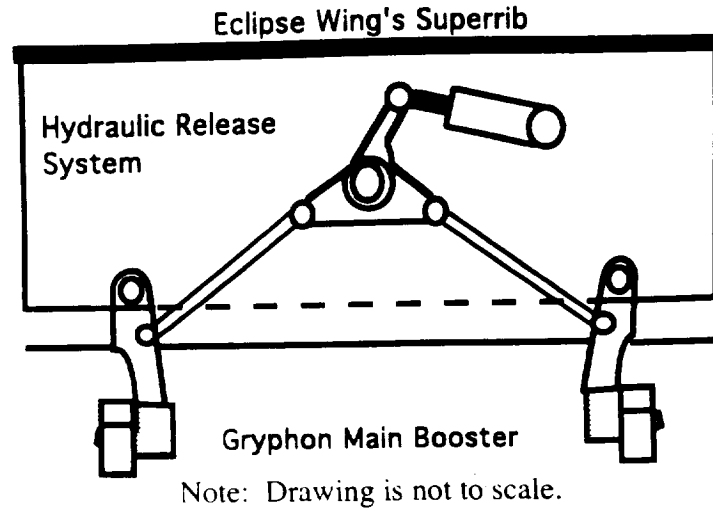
Side View Layout of Release Mechanism Geometry (Before)
